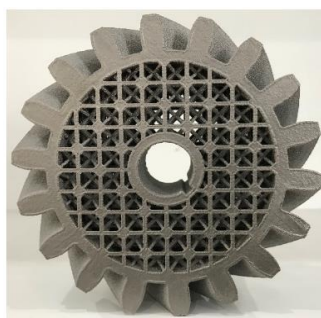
Helical gear with periodic lattice structure manufactured using Electron beam-melting (EBM) machine ARCAM [14]
